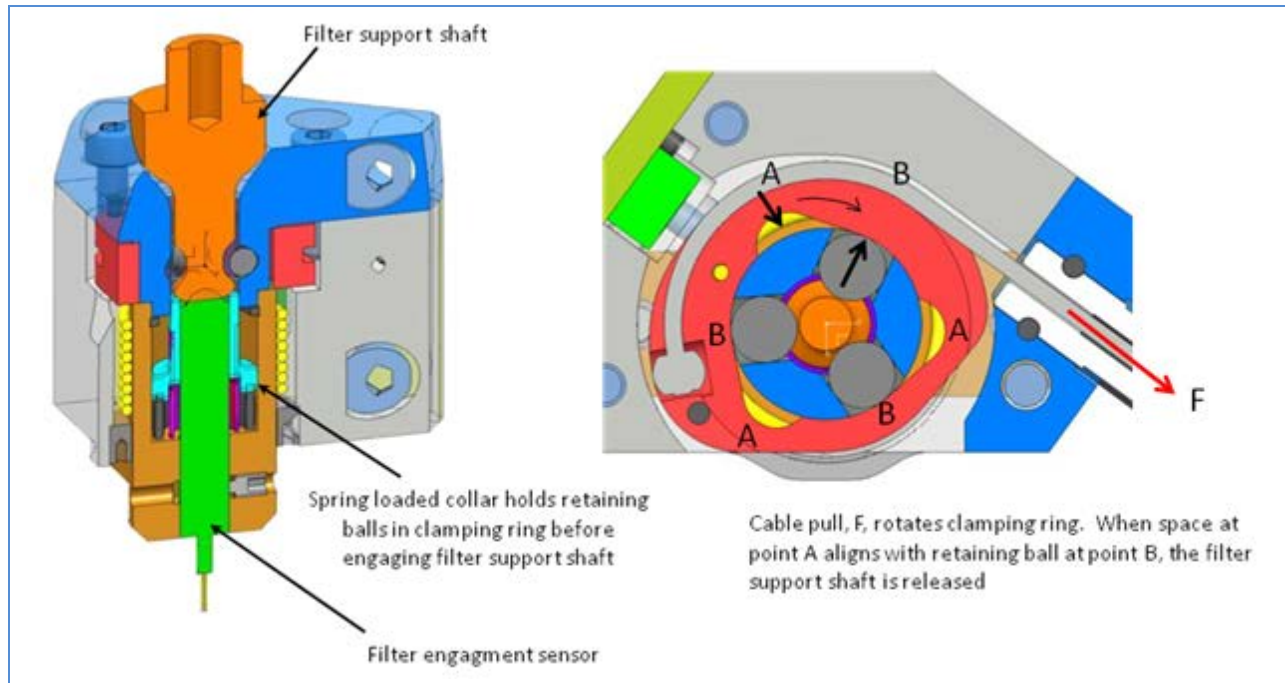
Carousel filter clamp showing retaining balls engaging on filter support shaft
